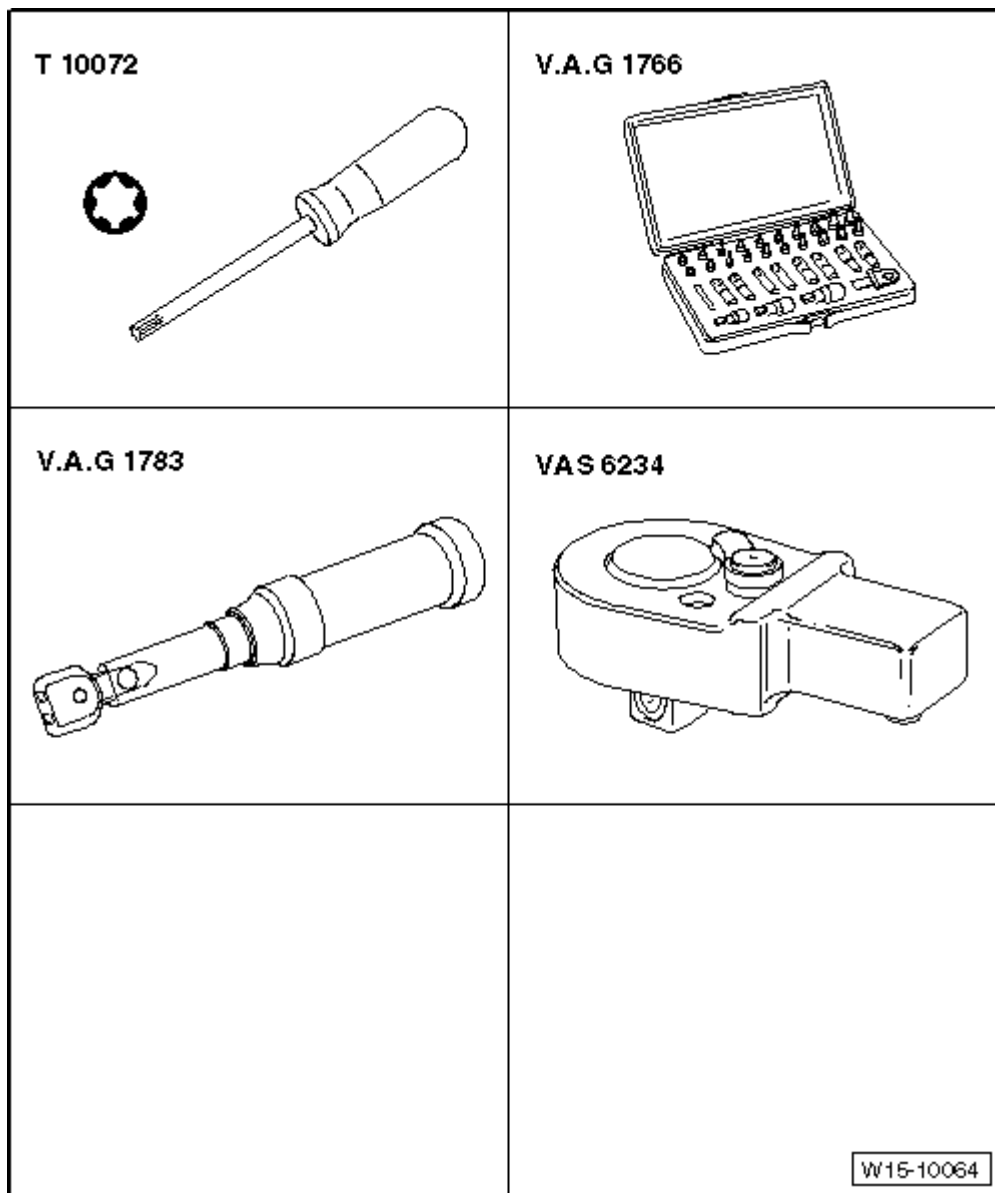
Identifying Special Tools - Camshaft Adjuster Valves, Removing And Installing
